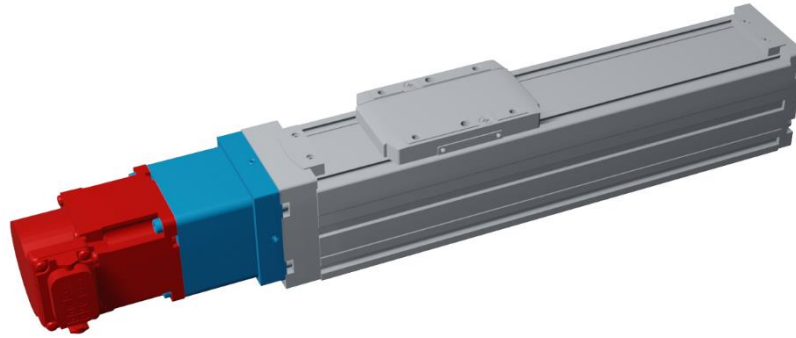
CAD Drawing of a motor (red), adapter (blue) and linear positioning axis (grey)
